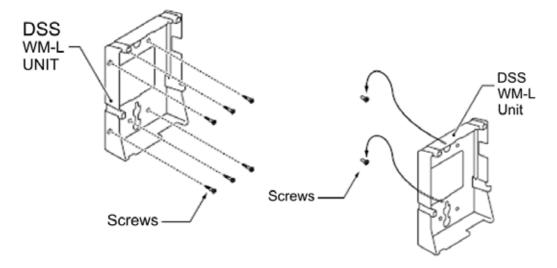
Attach DSS WM-L UNIT Using Screws
